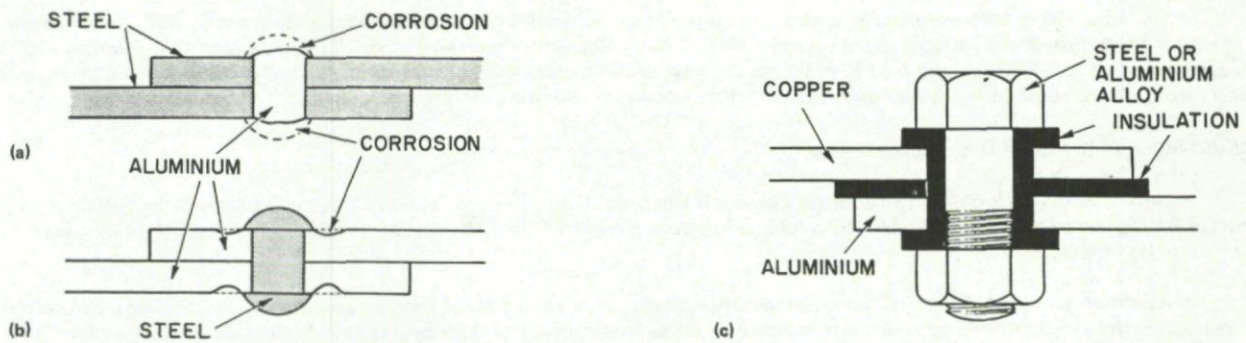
Dissimilar-metal corrosion (bolted and riveted joints). (Ref. 6-5)
